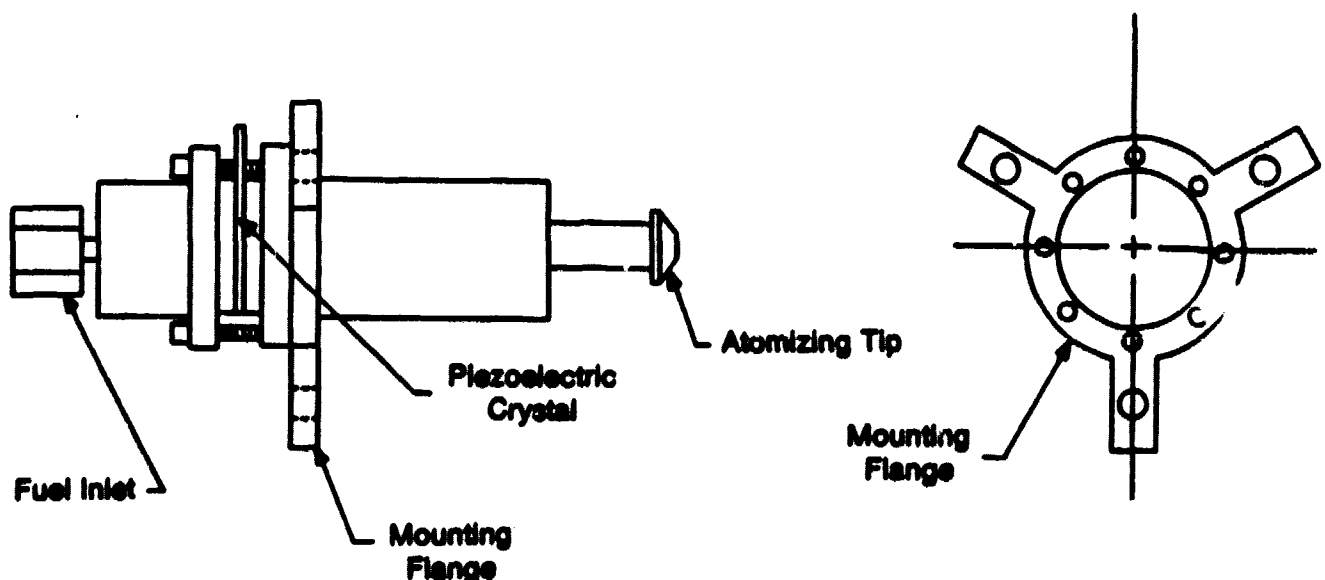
Outline of Sono-Tek Nozzle and Mounting Flange
